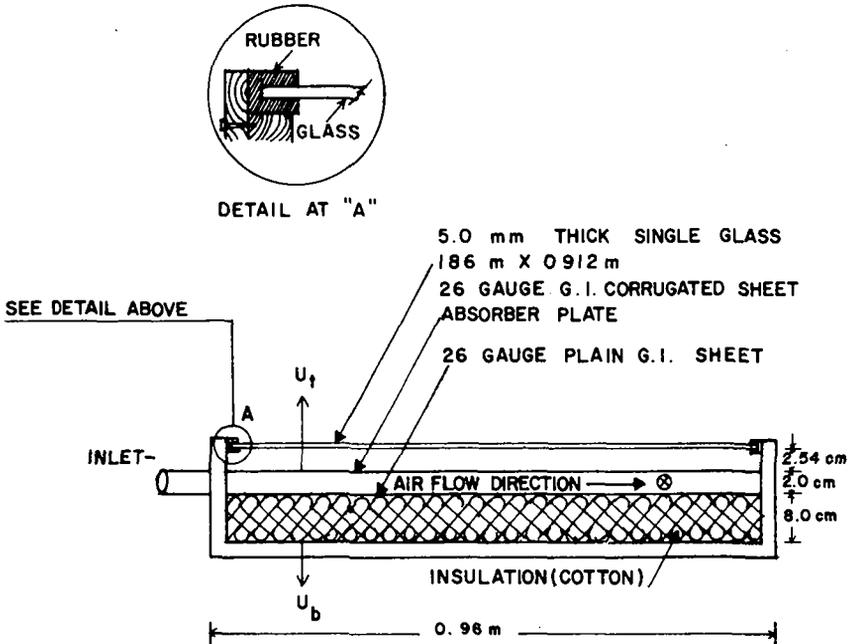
SECTION VIEW OF SOLAR AIR COLLECTOR.
